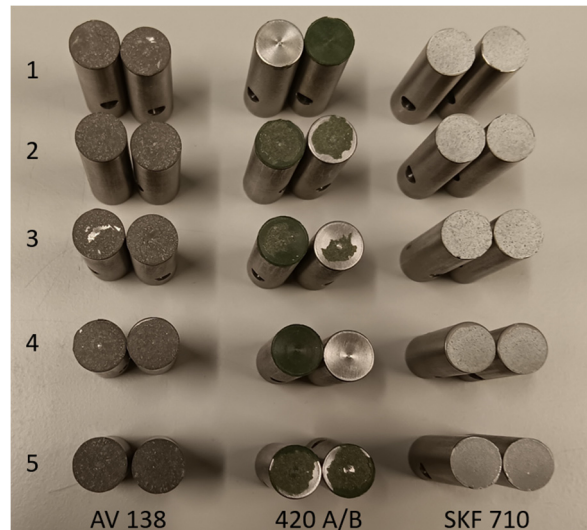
Failure surfaces of butt-joint specimens for the three adhesives.
